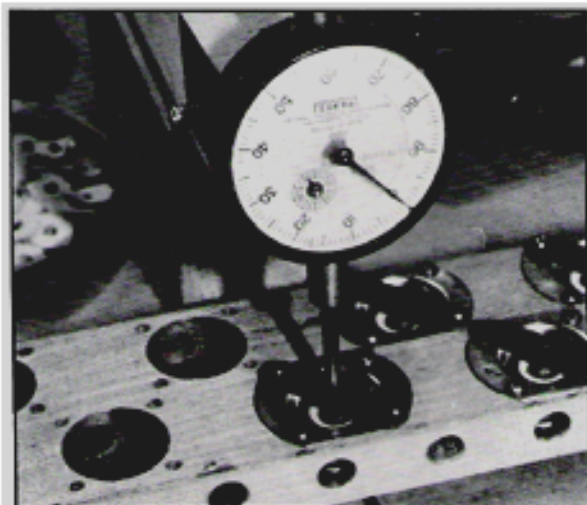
HOLD VALVE CELL BOARD DOWN WITH VALVE AT REST TO SET INDICATOR AT "O".
